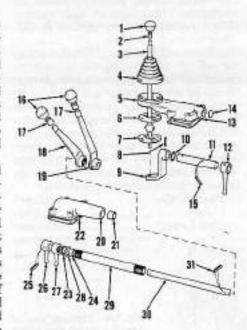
Exploded view of range and transmission selector levers for 1190, 1290 and 1390 models. Platform and cab equipped Models 1490 and 1699 are similar.
